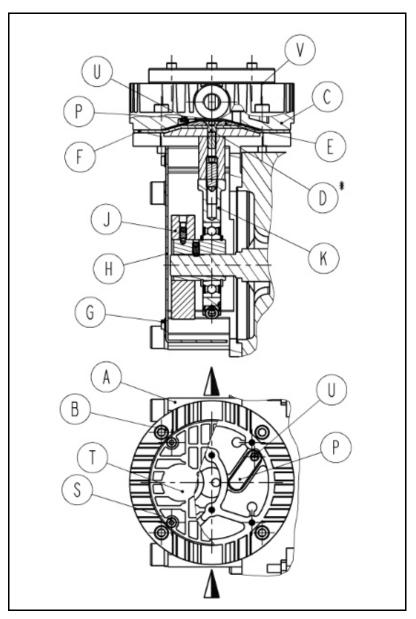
Pump parts for single-head versions with aluminium head *not for .9 versions
